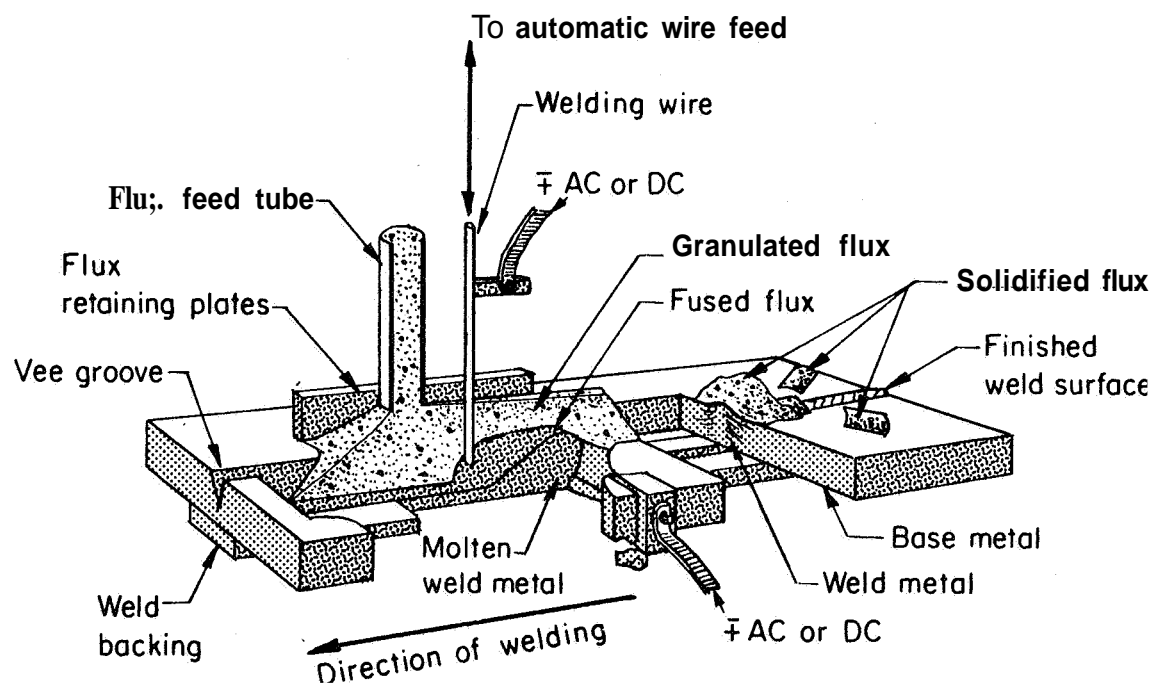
SKETCH OF SUBMERGED-ARC WELDING OPERATION
